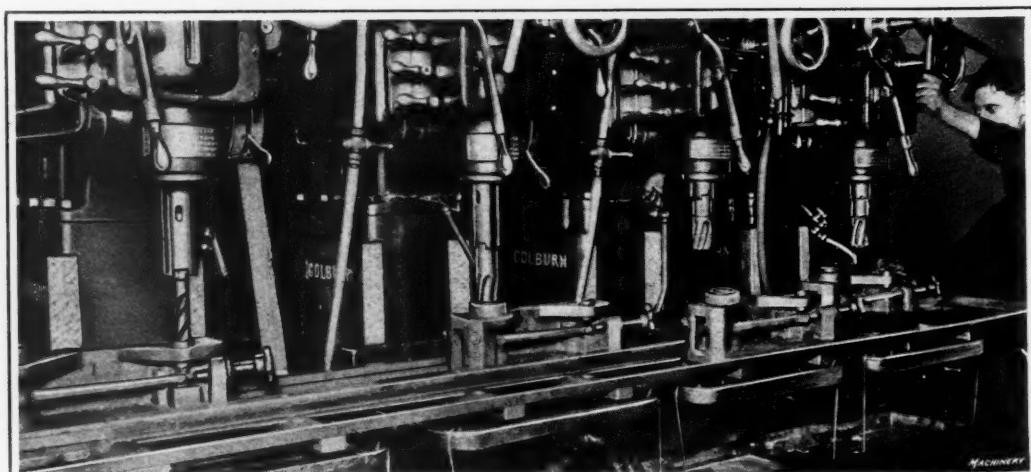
Gang of Four Colburn High-duty Drilling Machines equipped with Sliding Jigs for drilling Hupp Connecting-rods. One Spindle is held in reserve to substitute as required
